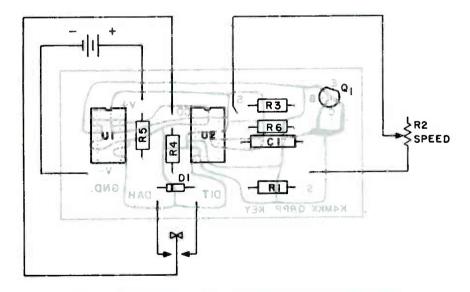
COMPONENT LAYOUT FROM TOP OF CIRCUIT BOARD.
